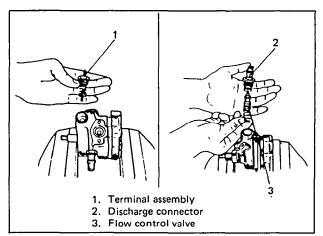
B1-45 Removing Terminal Assembly and Discharge Connector
